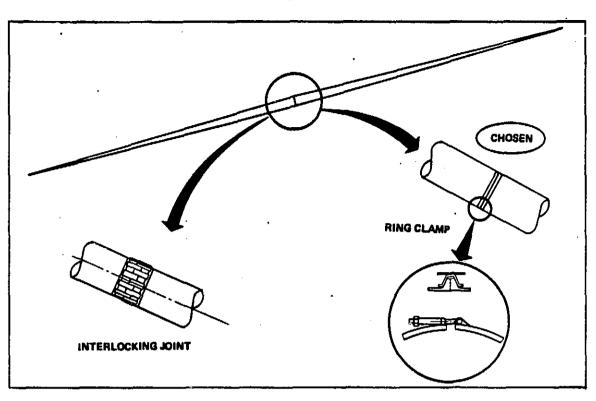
LSS-3 Truss Member Center Joint Trade Study
